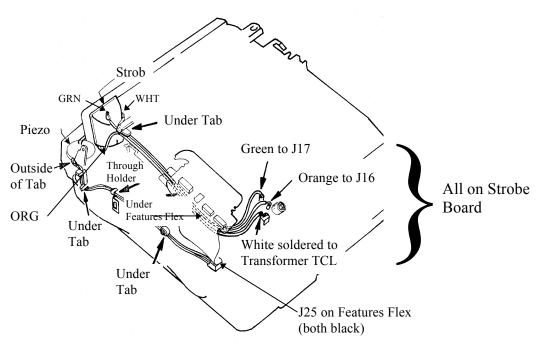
Routing Strobe Wires Routing Piezo Wires
